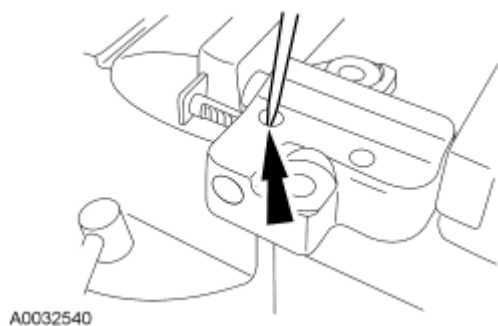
Holding Ratchet Mechanism Using Small Pick
